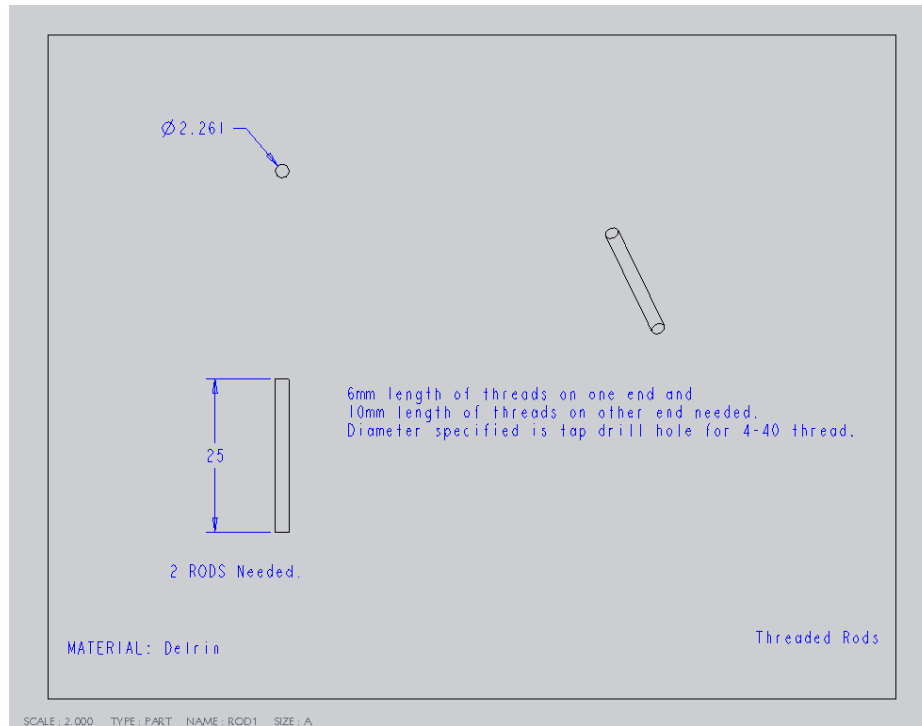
CAD drawing of threaded rods to connect top and bottom platforms
